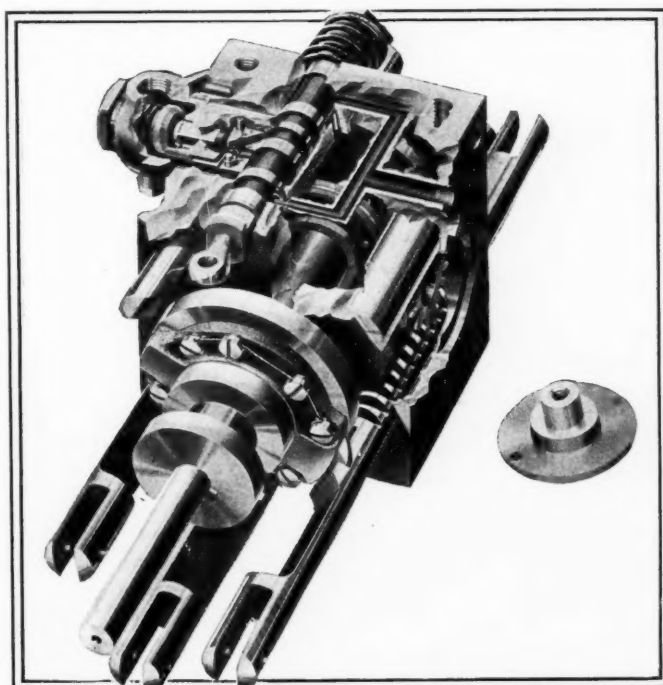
Cutaway view, showing exact relationship of the parts to one another just after a shift has been made and before the clutch is re-engaged
